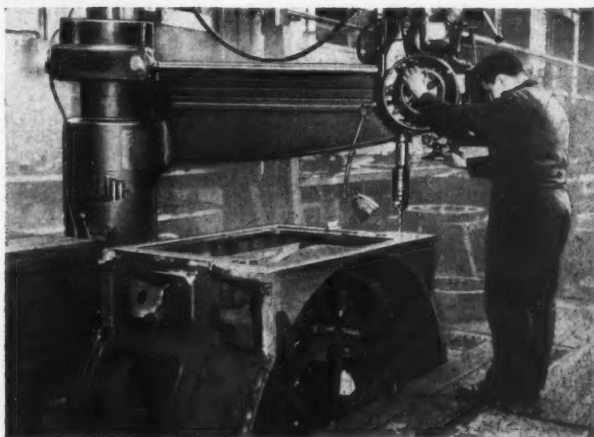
After certain assembly operations have been performed and holes have been marked out, bases for No. 10 Verticalautos are drilled on this Asquith OD1 radial machine. The base is mounted on a spider, which has a central shaft with ball races at either end, and jack screws on the front ring of the spider are engaged with a machined annular face. This complete assembly is loaded into bearing seatings in the pit adjacent to the Asquith machine, and the various facings and pads to be drilled are set horizontal, in turn, by means of a spirit level. The back ring of the spider has tapped holes, on 4-in. centres, to receive a clamping screw in an angle bracket on the floor plate of the machine.
